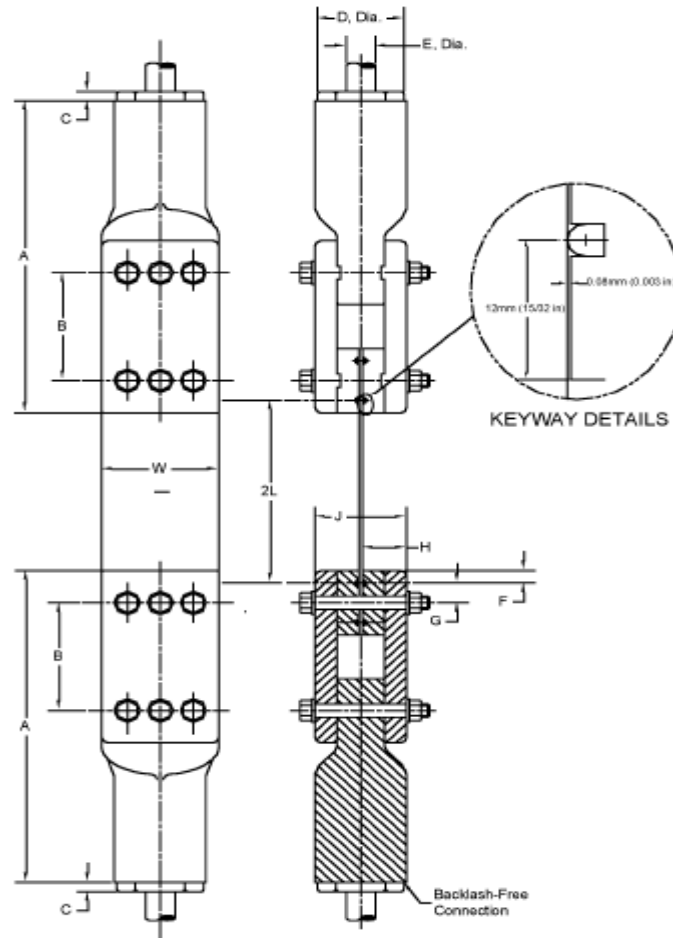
This illustration shows a typical 100 mm(4-in.) wide M (T) specimen bolt and keyway system used for a grip (ASTM E647–13, 2014).
